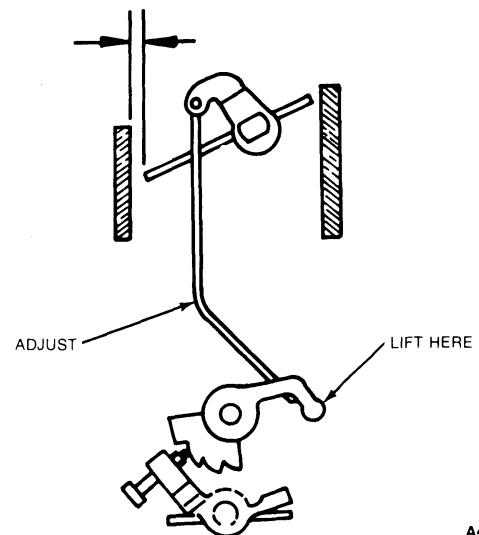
Fast Idle Cam Set—Holley 4180-C-4V (Hot Air Only) Carburetor
